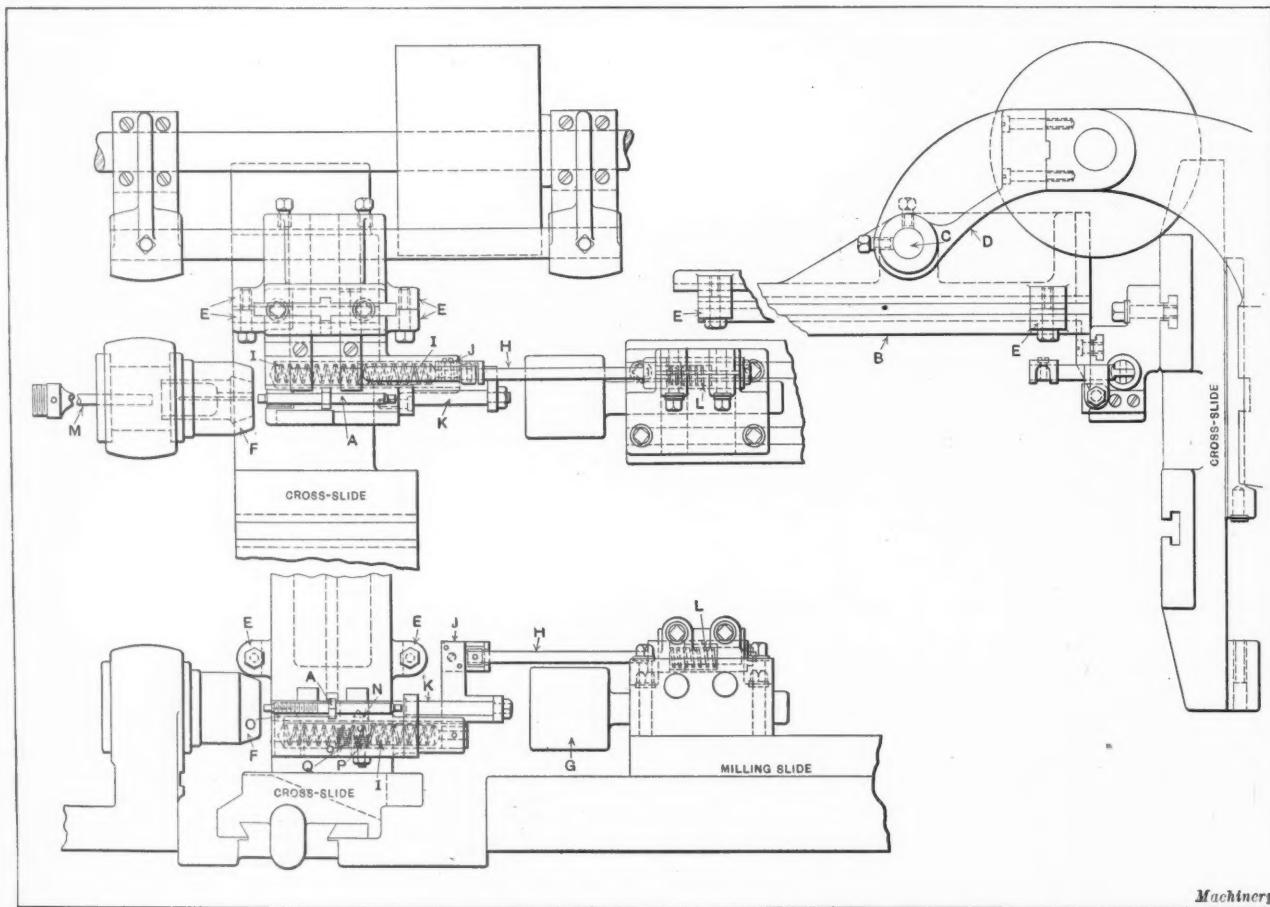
Arrangement of Mechanism of the Feeding Magazine shown in Place on the Machine in Fig. 8
